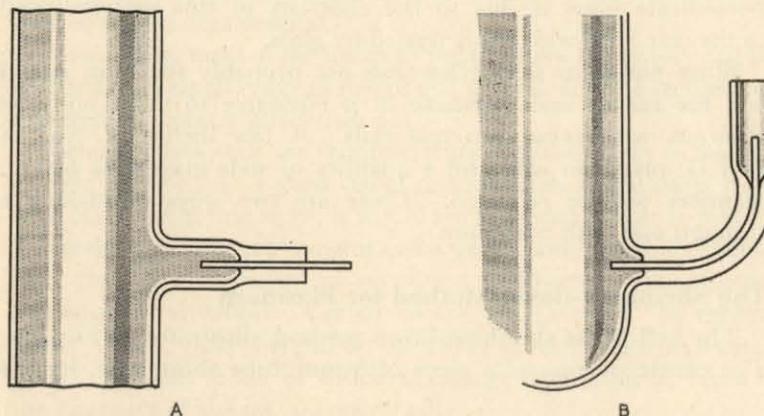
THE SEALED TUBE IS CUT AT THE LARGER DIAMETER AND SEALED TO THE MAIN GLASS PART TO FORM A SIDE SEAL (A), TO MAKE THE MERCURY CUP (B)
